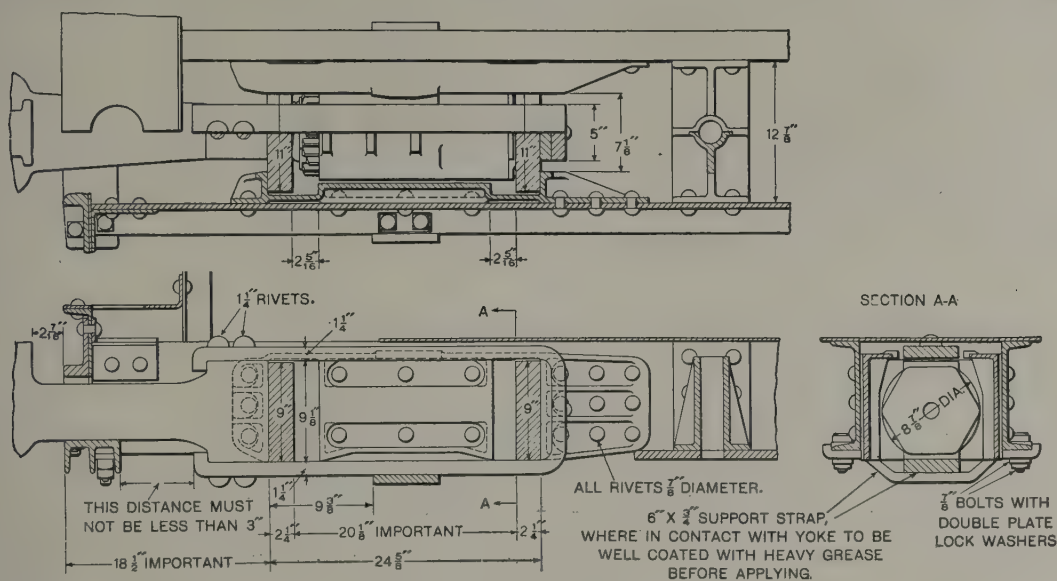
Section Through Westinghouse Friction Draft Gear, Type D-3. Westinghouse Air Brake Company.
